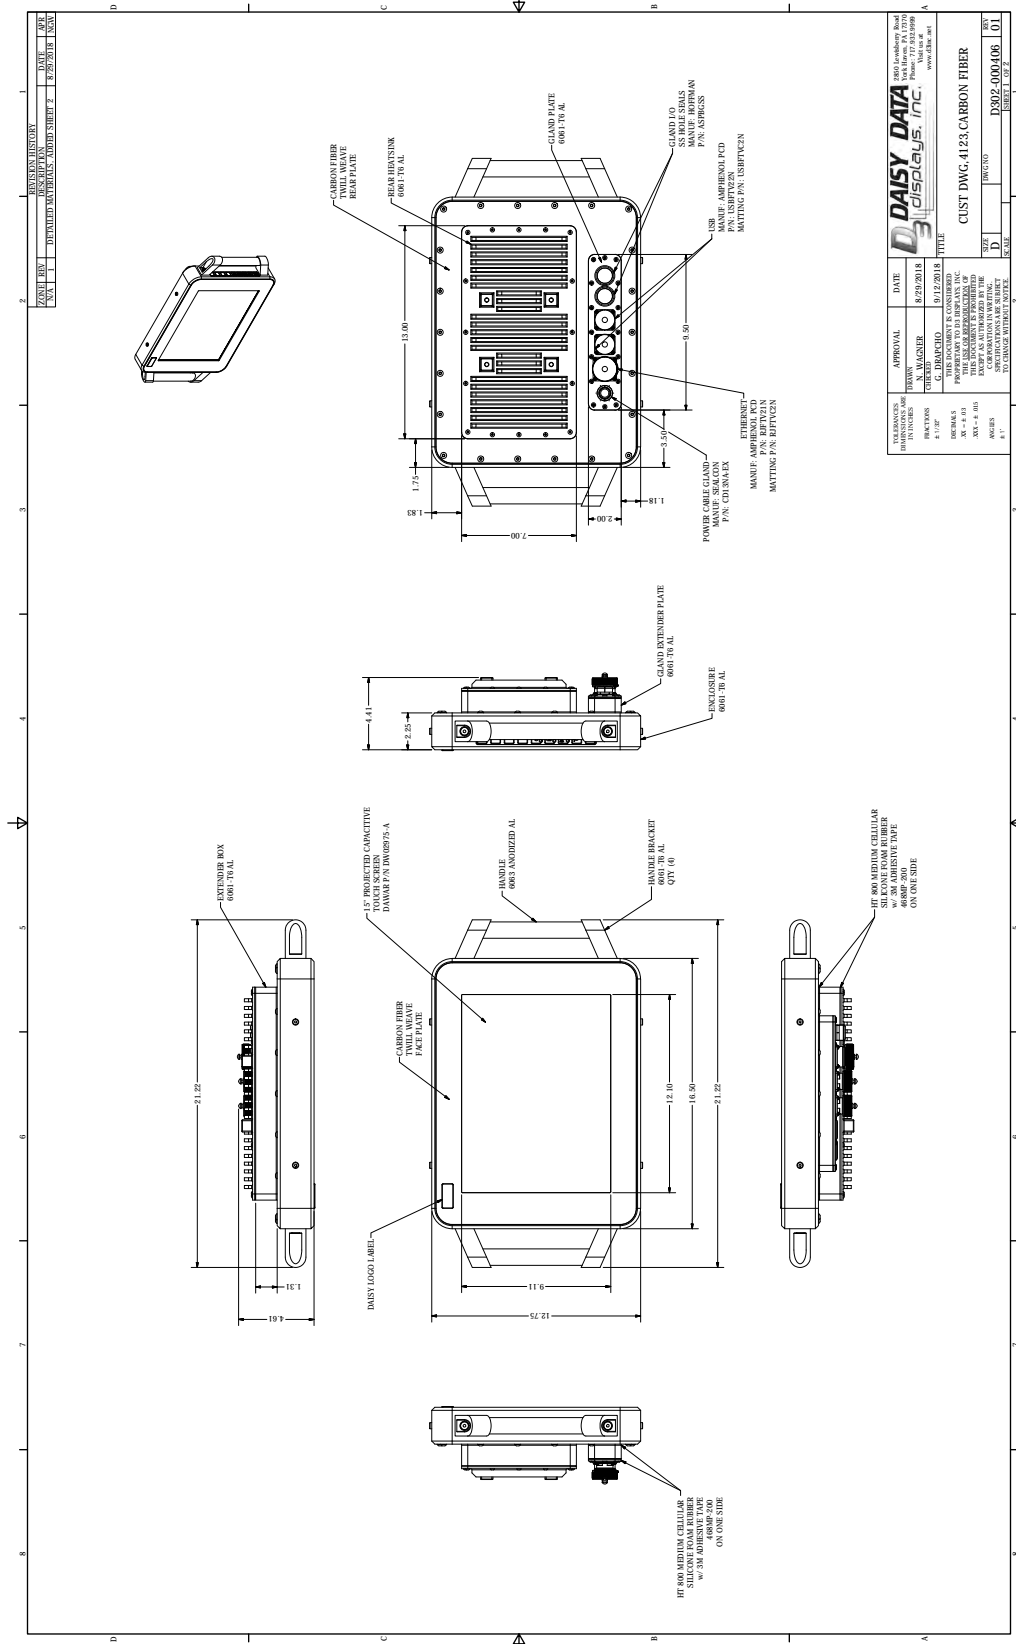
Model 4123 Mechanical Drawing (1 of 2)
